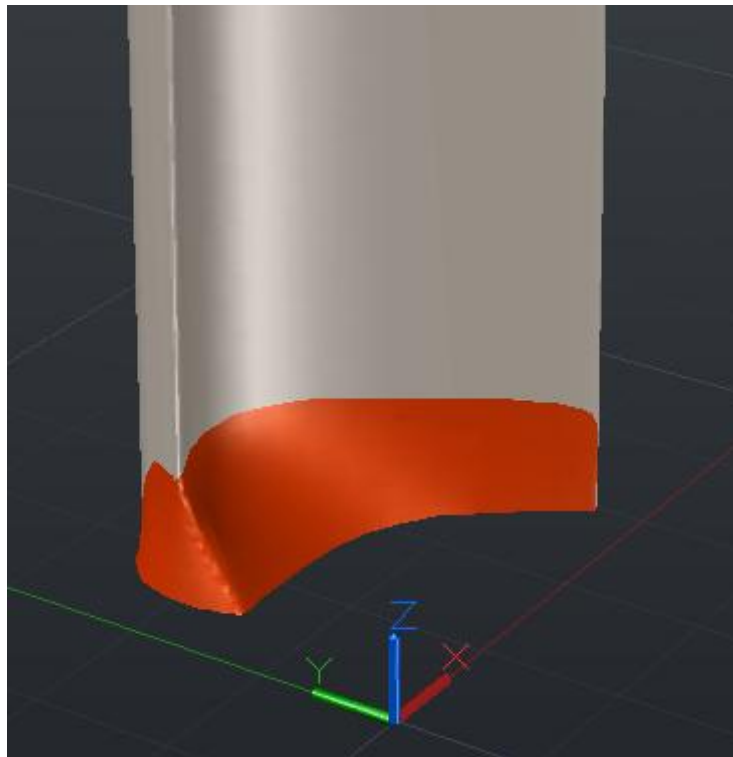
CAD model of the fillet modification used to mimic the L2F-EF airfoil design
